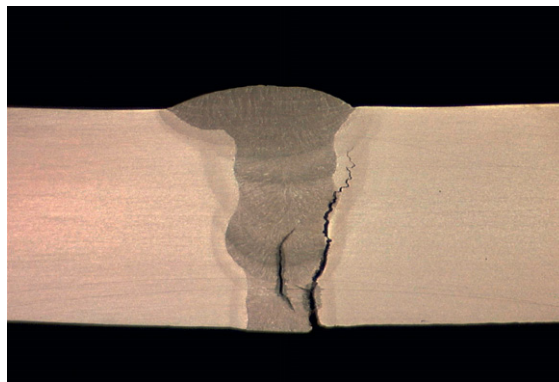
Hydrogen embrittlement (SSCC) of Pipeline weld.
